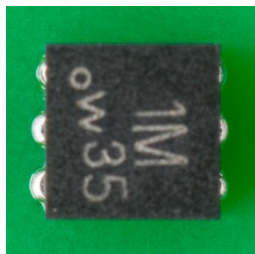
DFN2020-6 (SOT1118) Component D263 without wettable side pads
